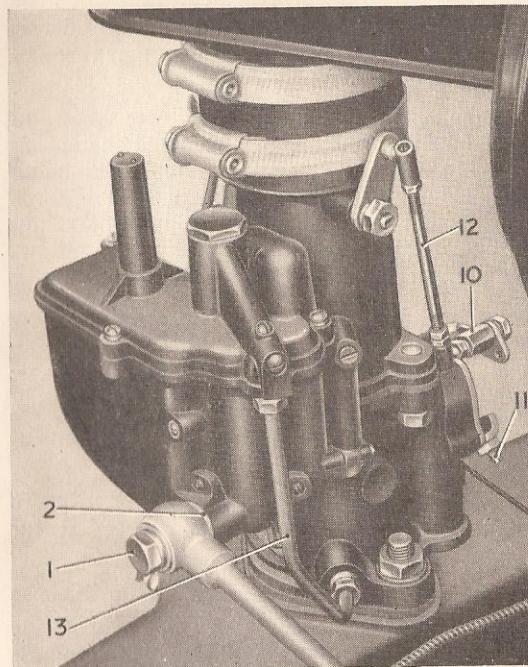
THE CARBURETTER—LEFT-HAND SIDE.
